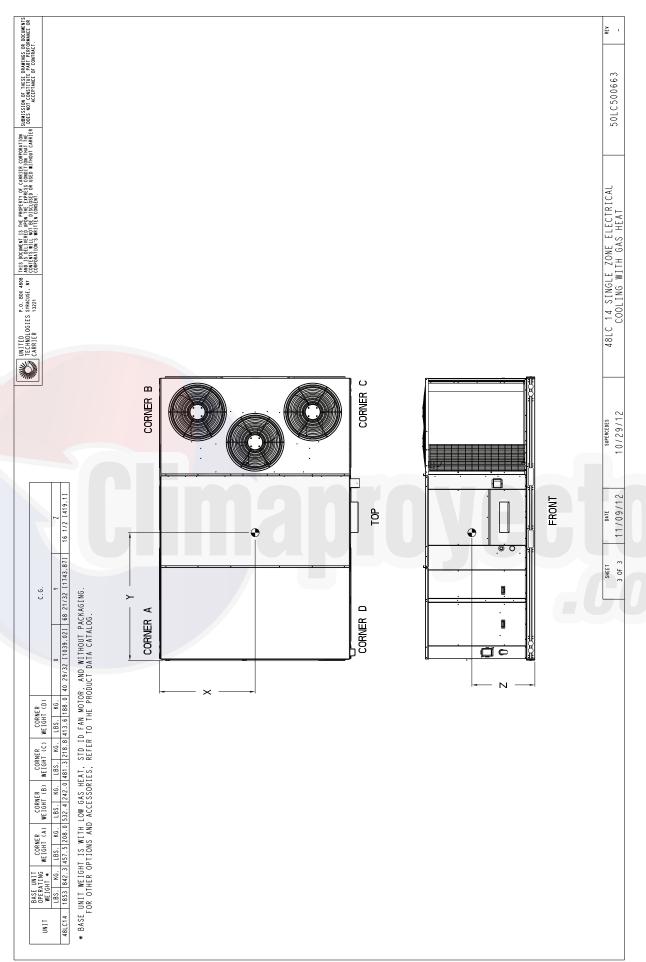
(cont.) - Unit Dimensional Drawing - 14 Size Unit, Sheet 3 of 3
